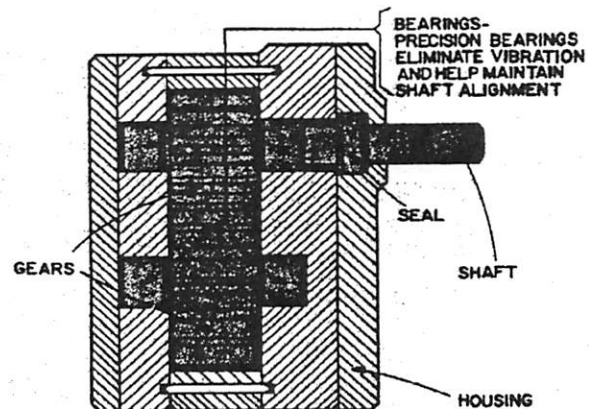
The bearings in this rotary gear pump are a typical application.
